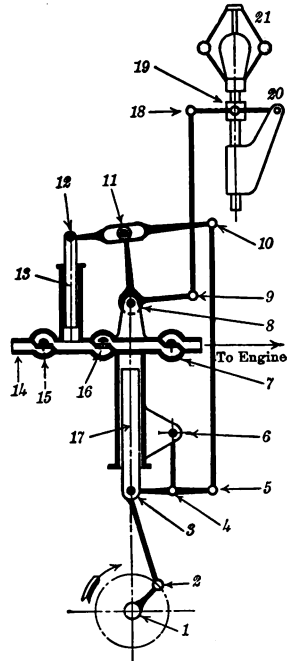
SPECIAL VARIABLE STROKE FEED PUMP AND VALVE GEAR WITH MEASURING PLUNGER
